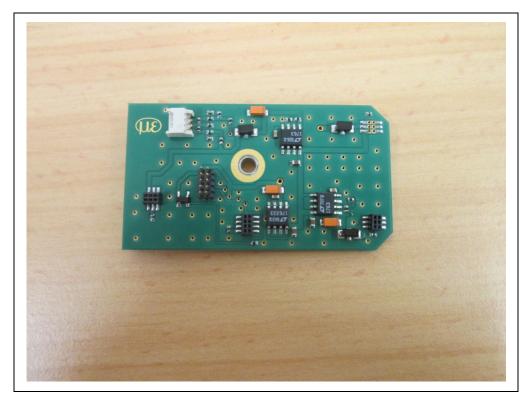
EUT, view of PCB 1 side 1 with connected sensor
